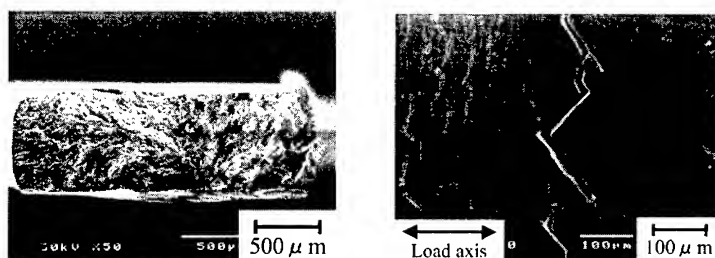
A low-magnification fracture surface and surface mesocracks of TiAlN/1 μm
